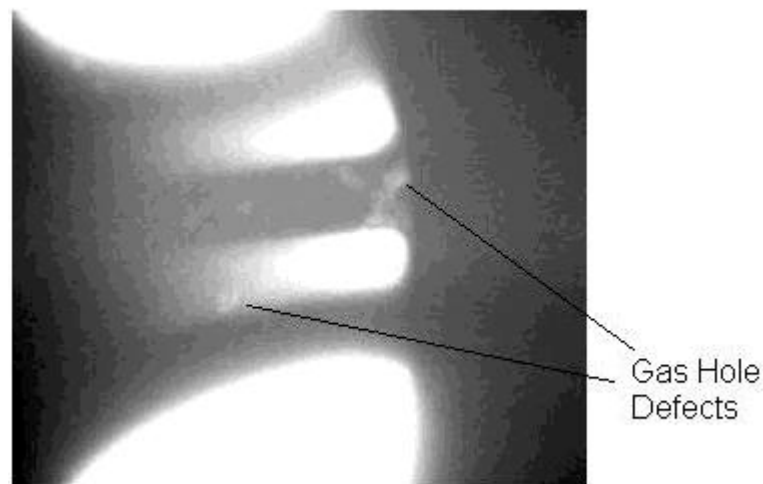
Gas hole defect in Al alloy cast wheel [38]
